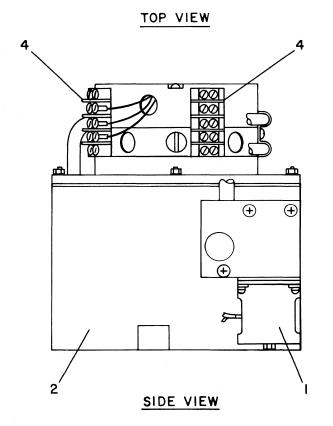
VACUUM/PRESSURE ASSEMBLY A1
